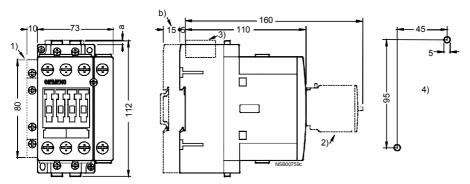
3RT133, 3RT153 with surge suppressor and auxiliary contact block
